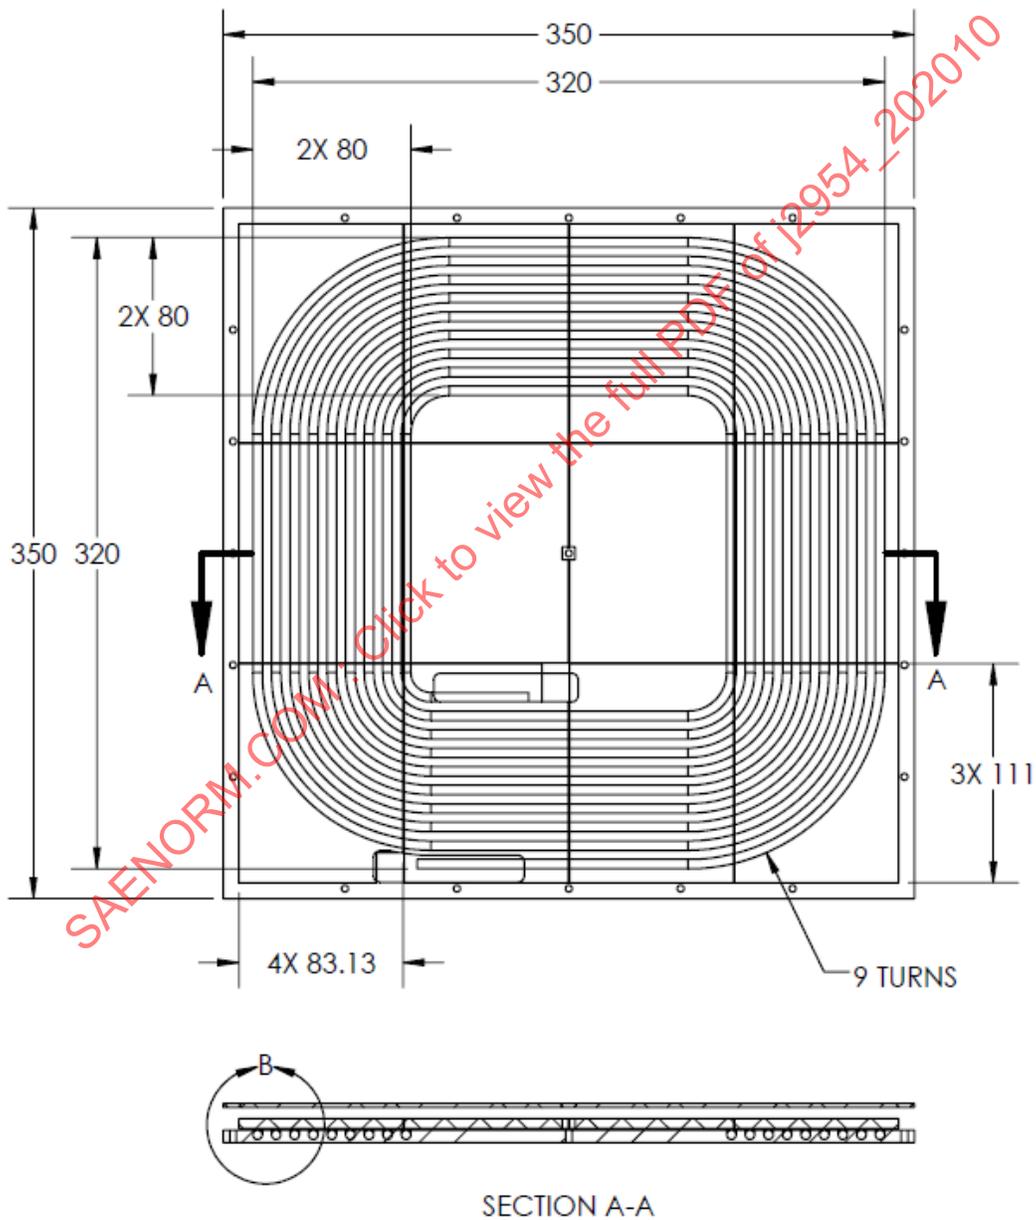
Mechanical dimensions of the Test Station VA WPT3/Z2
